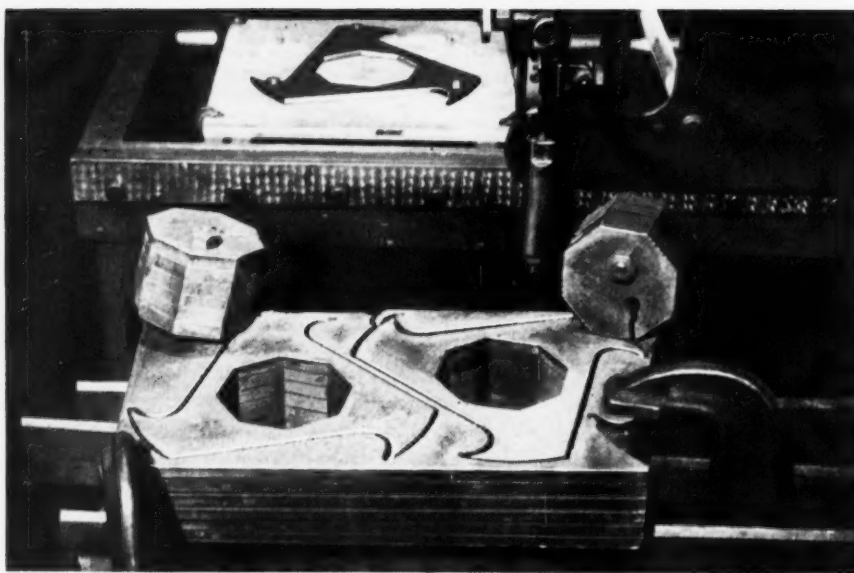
Close-up View, Showing Templet and Stack of 3/16-inch Steel Plates with Two Cloth-cutting Knives Completely Cut Out
